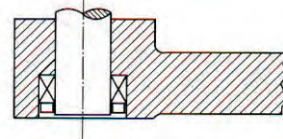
Lever mounted using one GSN 7012 locking assembly. This arrangement permits stepless movement of the lever to any degree of accuracy.
